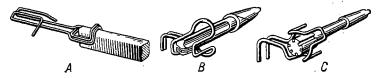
Inductors for heating by induced heat: a- for brazing and welding of tips on to cutter holders; b- for brazing of drills; c- for brazing of reamers
